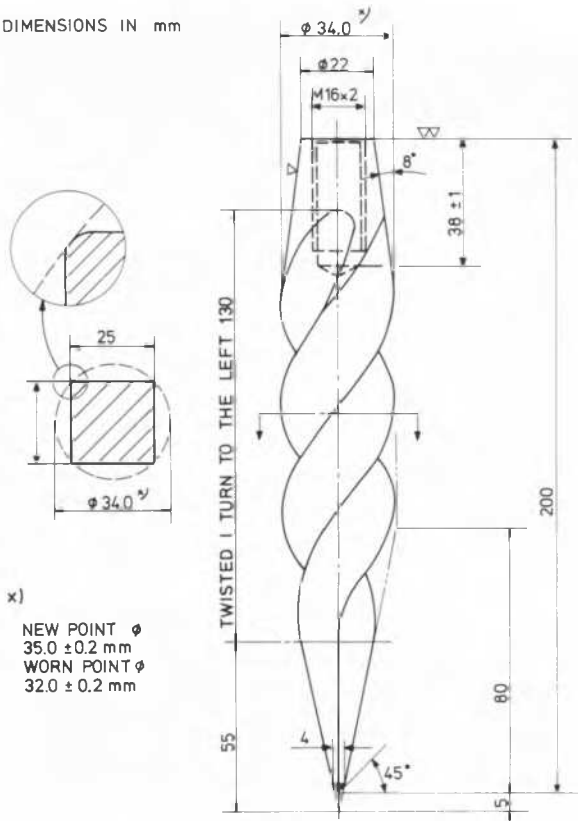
Recommended tolerances for the manufacture of weight penetrometer points.
